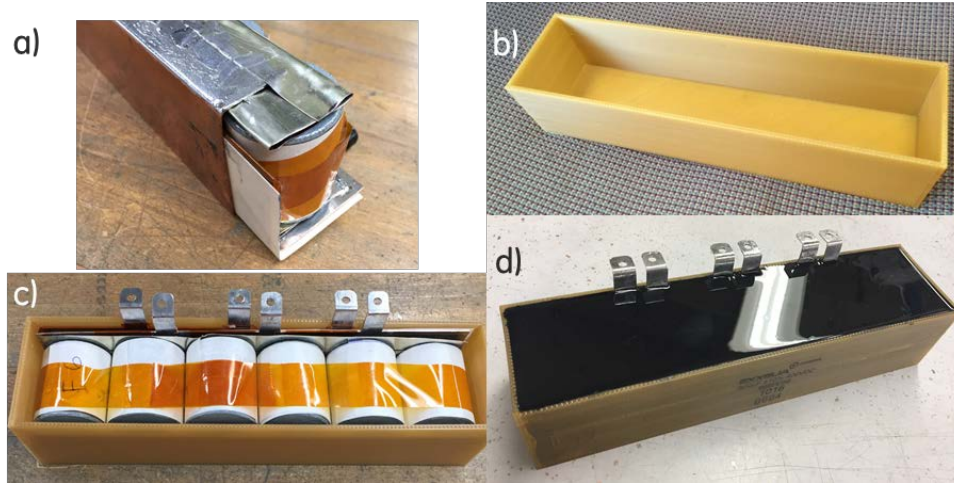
$300 \mu\text{F}$ capacitor module assembly. a) Bus bars on bobbins b) The empty case c) Bobbin assembly inserted into the case d) The completed module ready for delivery.
